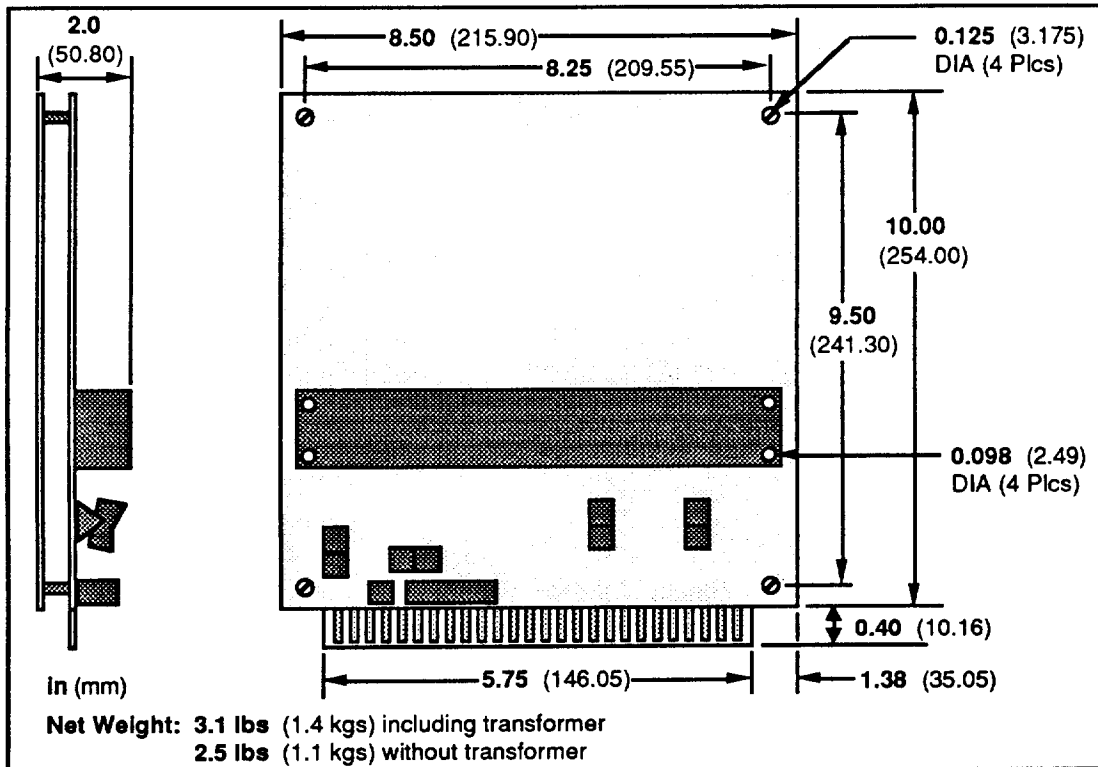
Model 150 Dimensional Drawing and Weight Specifications
